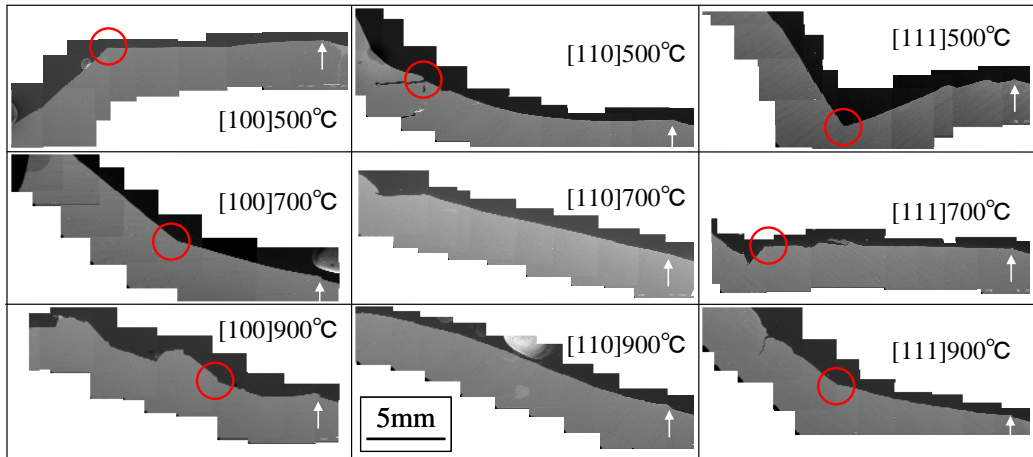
Side face of fractured specimens. Circles indicate the transition points from stage-II to stage-I cracking at side faces of specimens. Arrows show machined notch tips.
